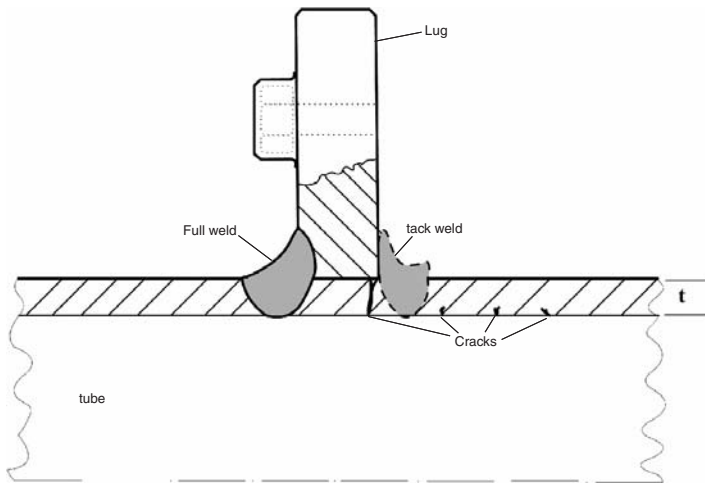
Sketch showing the location of the cracks on the tube
